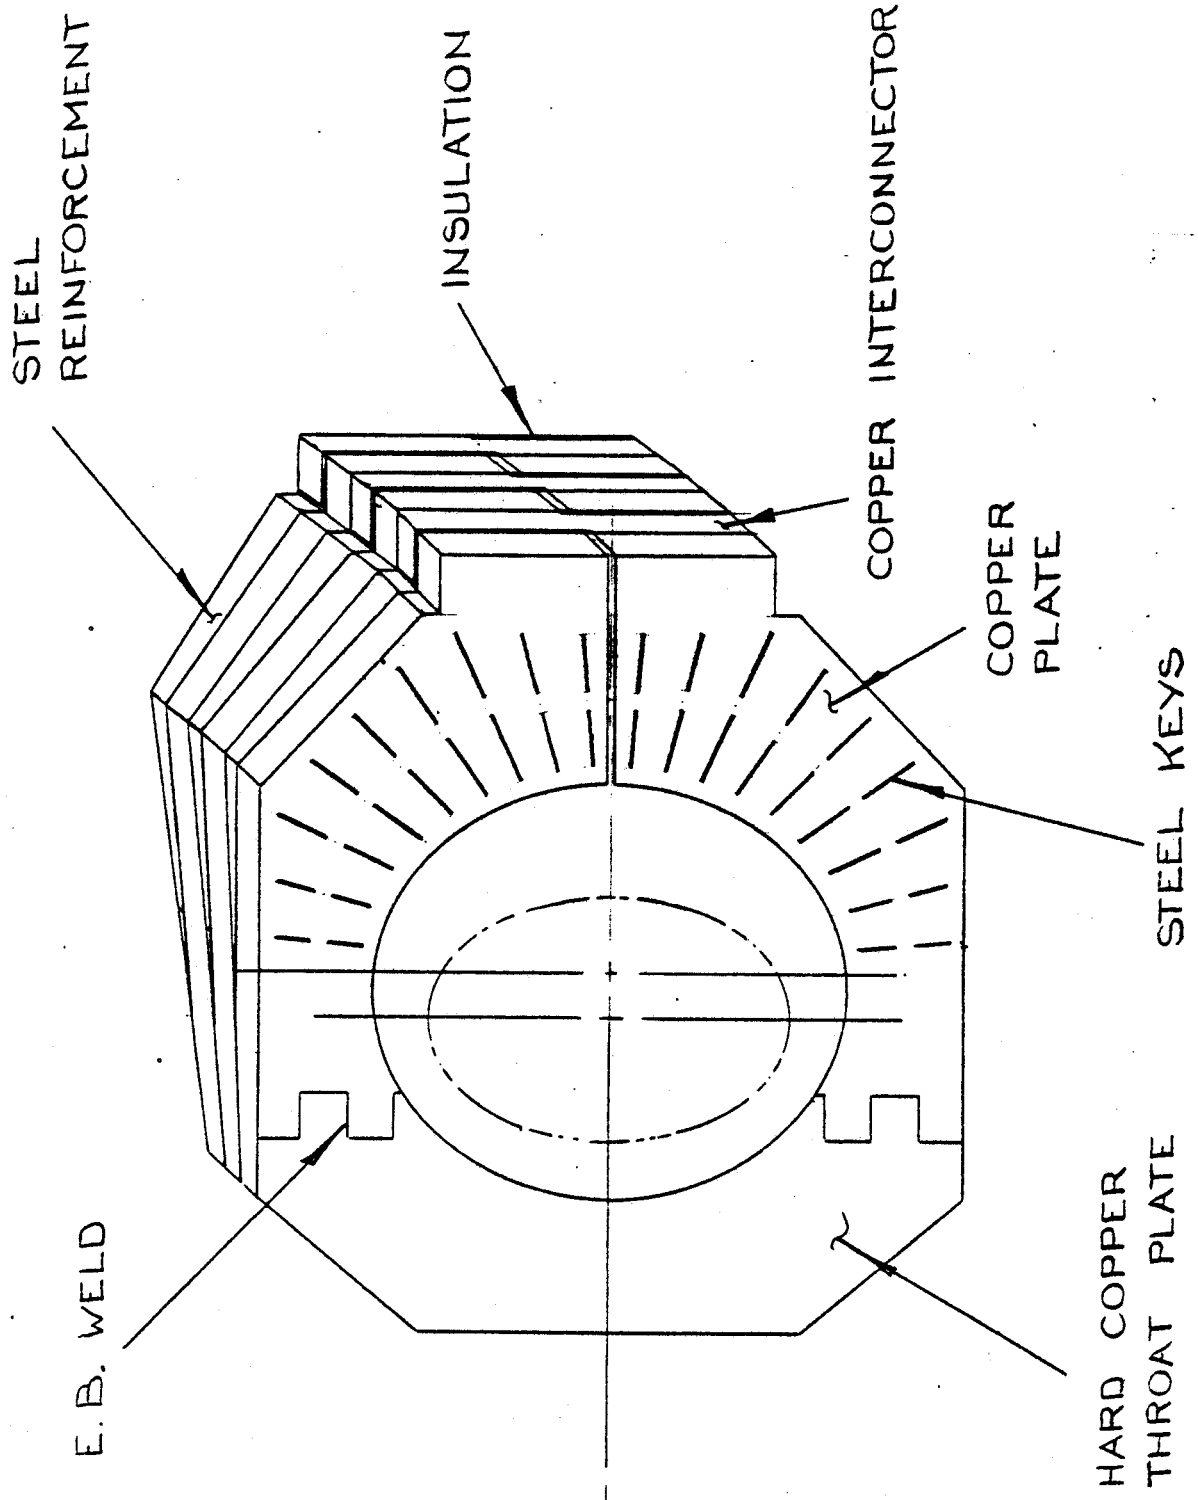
Three-Piece Copper Plate Construction Showing EB Weld Line to Reduce Stresses
